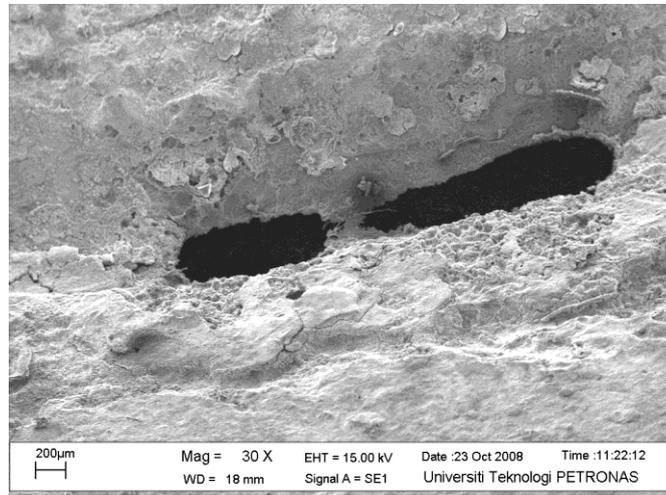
SEM fractograph shows the location of major leaking at the welding line.
